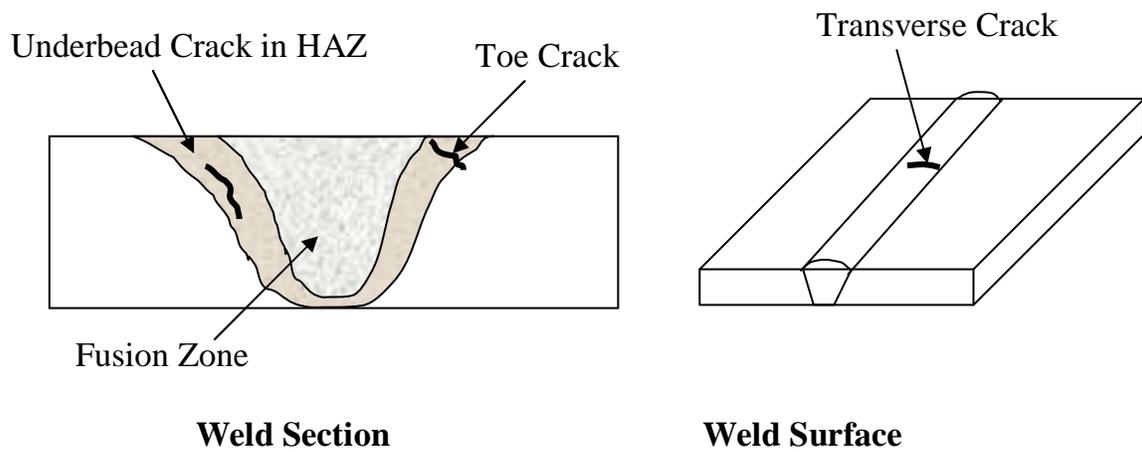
Schematic showing locations of typical cold cracks in welds.
